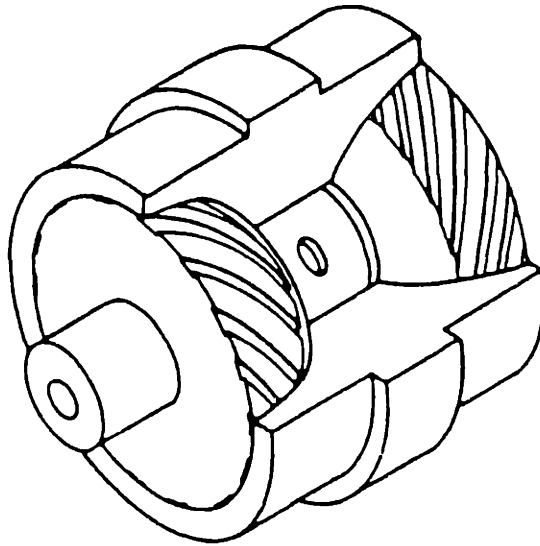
Spiral-grooved hemisphere gas bearing (from reference [12])
